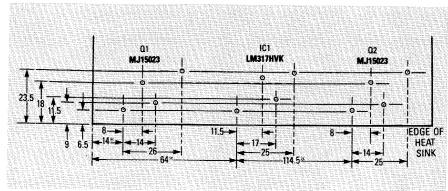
POWER SUPPLY HEAT SINK LAYOUT. All marked dimensions are in millimeters, all mounting holes are $\frac{1}{4}$ -inch in diameter, all lead holes are $\frac{3}{4}$ -inch in diameter, and add 3 mm to all dimensions with an (*) to align the PC boards.
